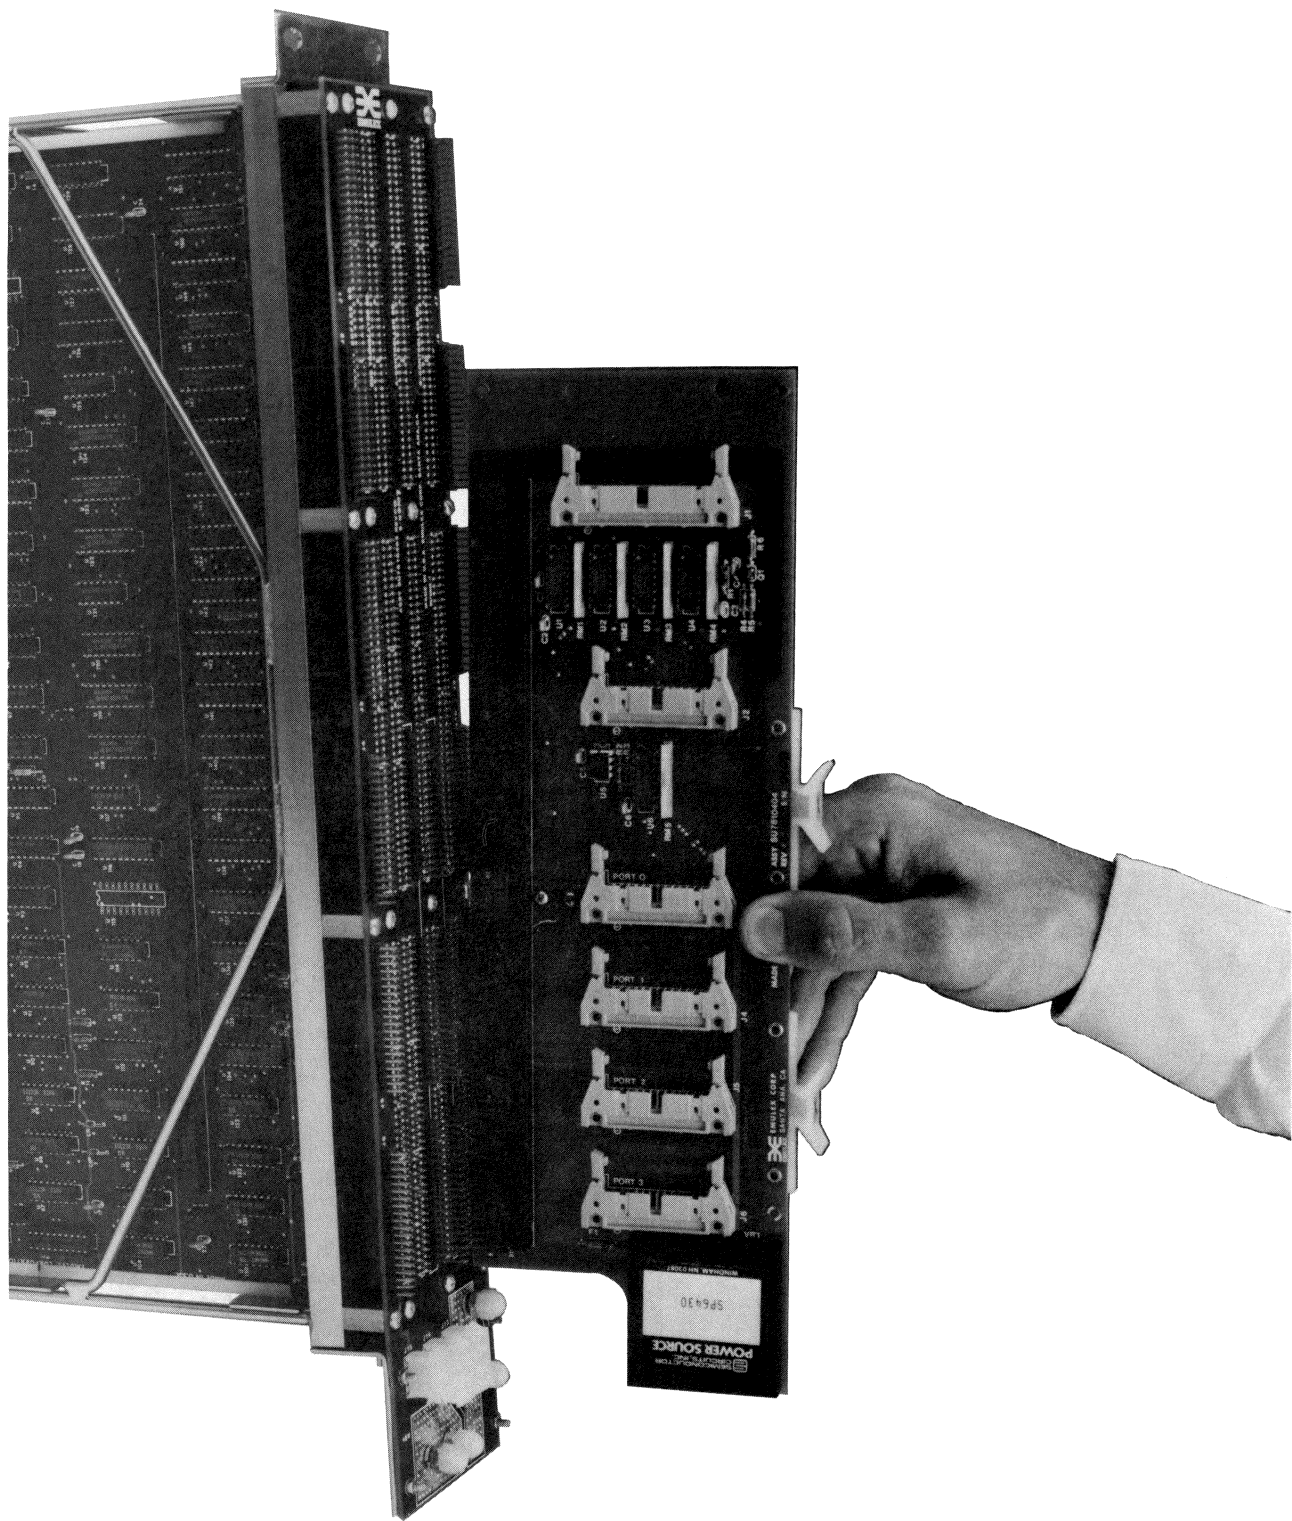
Cable Paddleboard PCBA Installation in V-MASTER/780 Card Cage
